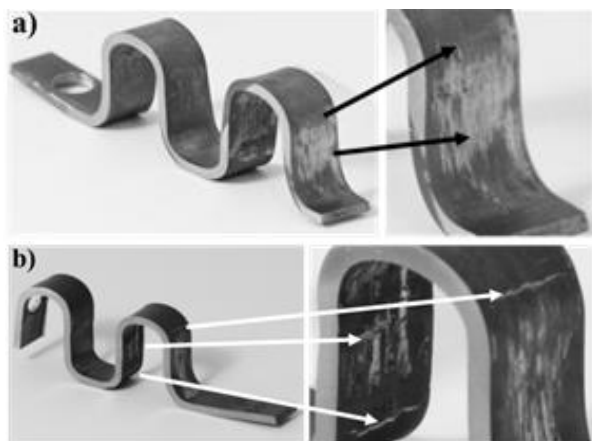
View of cracks of parts formed at 600°C (a) and 900°C (b).
